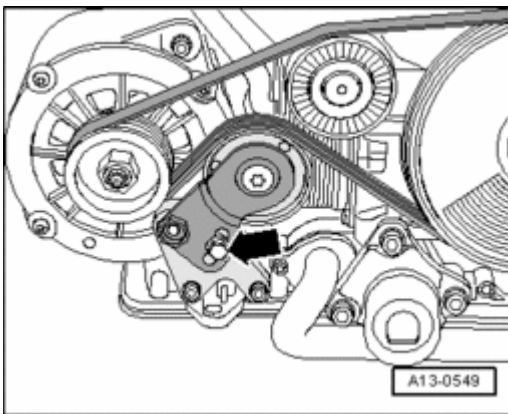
Loosening Tensioning Bolt And Ribbed Belt
